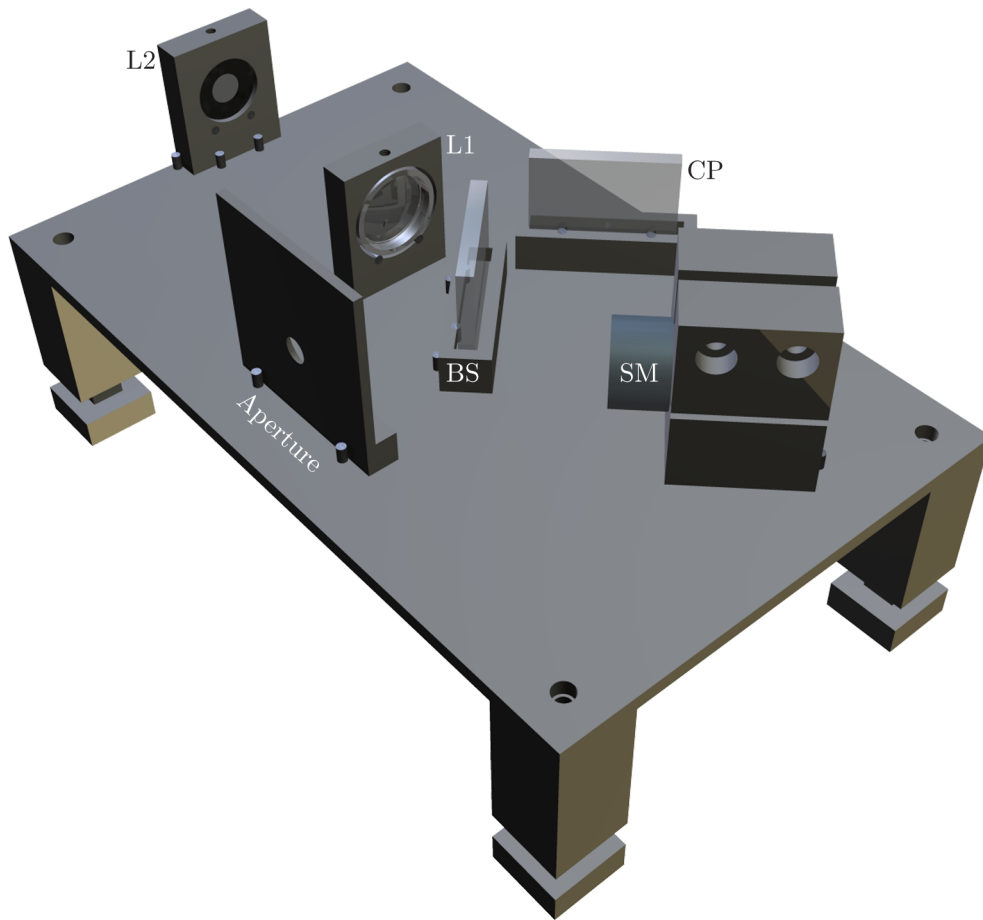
CAD model of fully assembled OBA. The optics are installed in the mounts as well. For component explanation, see Fig. 2.4.
